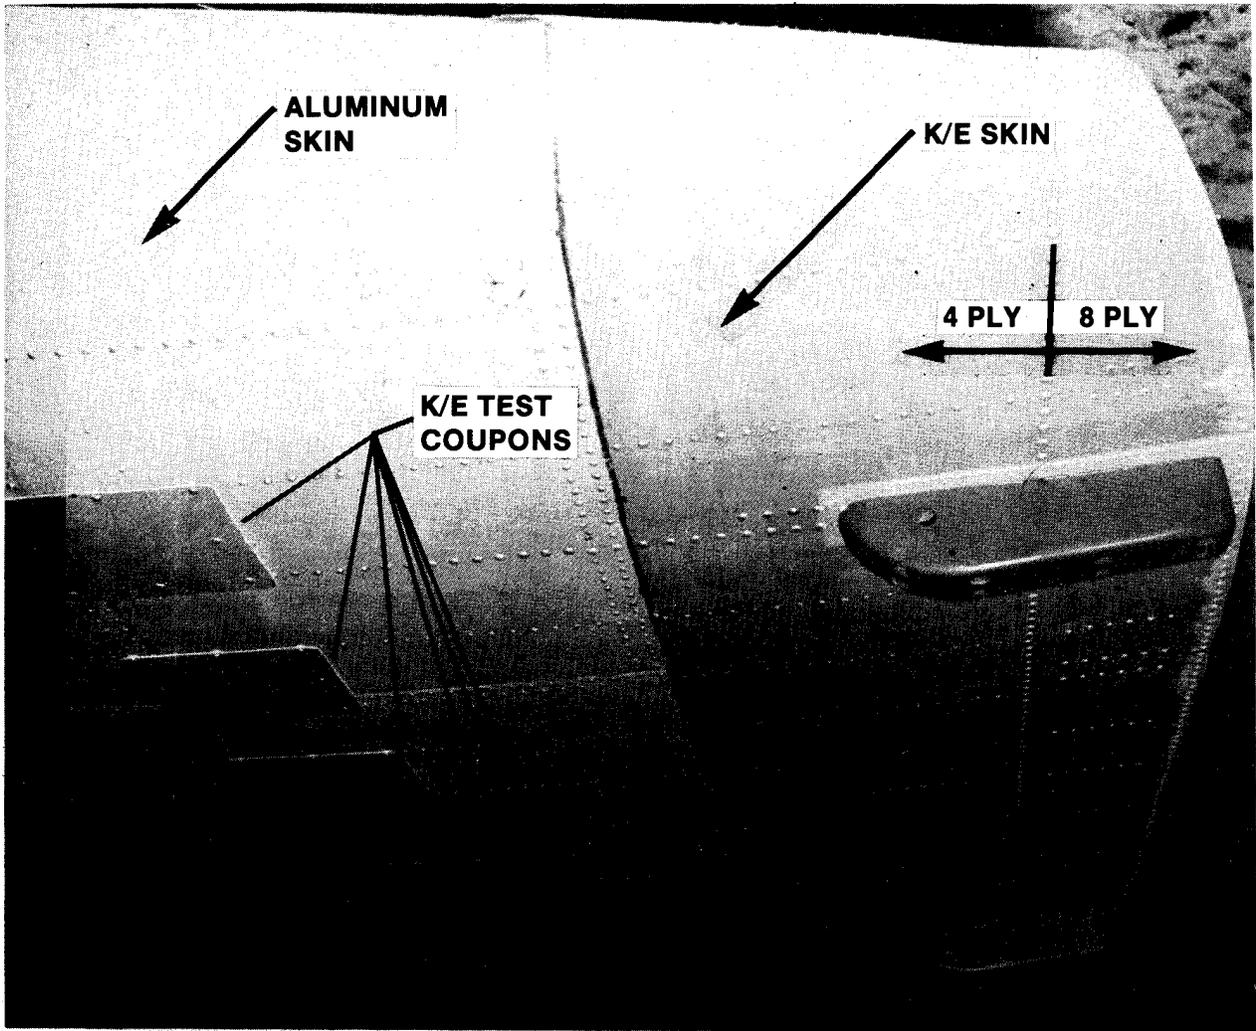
COMPLETED RAMP WITH KEVLAR/EPOXY SKIN PANEL AND TEST COUPONS INSTALLED. (PHOTO COURTESY OF U.S. NAVY)
